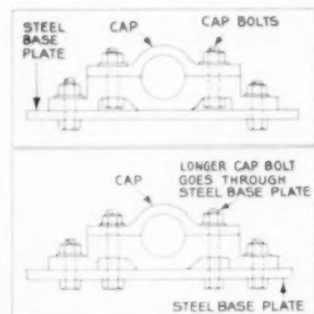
(top): Former method of bolting bearing cap to main casting. Fig. 2: By having the cap bolts go through the entire casting and base assembly, there is now sufficient strength to withstand conveyor braking
